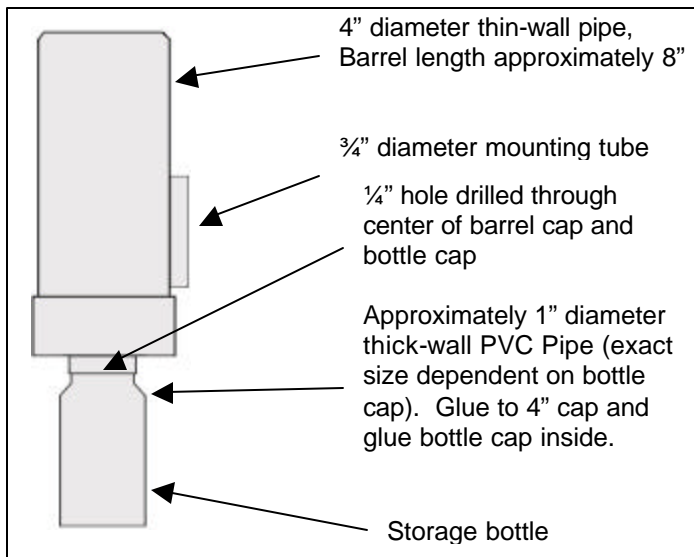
Constructed using glue (solvent weld) between barrel and bottle cap. Use additional small diameter PVC pipe to reinforce cap connection.
